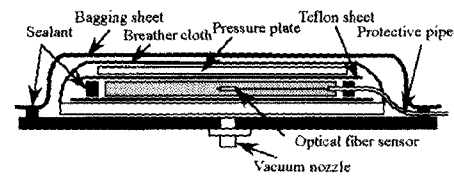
Prepreg lay-up assembly for the autoclave molding.
